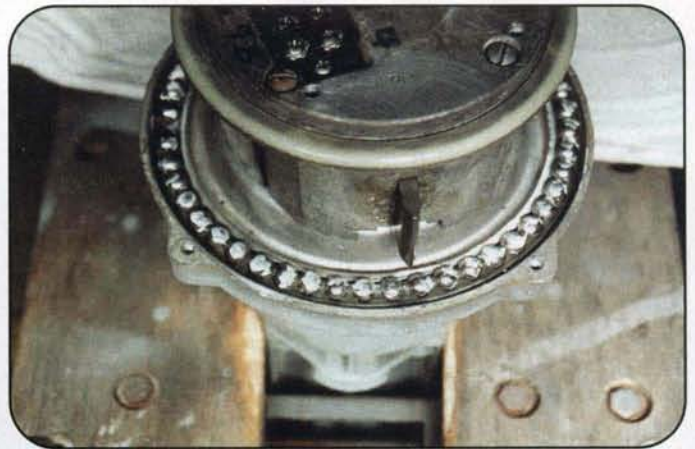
The plastic spacer (there is no spacer in the TR/CD units) may remain on the rotor unit, and it must be removed from the rotor or housing and set aside for cleaning and inspection (see steps 3 and 4).
